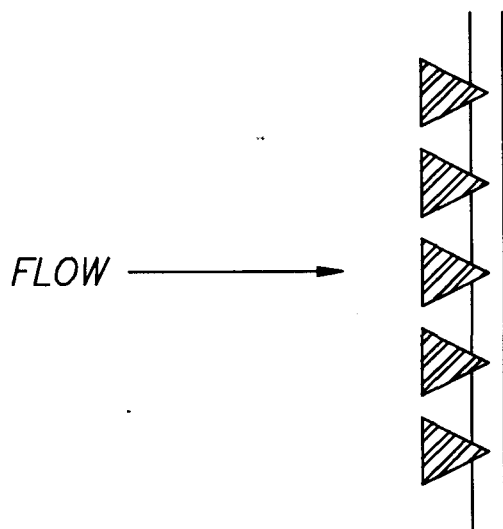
Sectional view of a welded wedge-wire screen panel.
